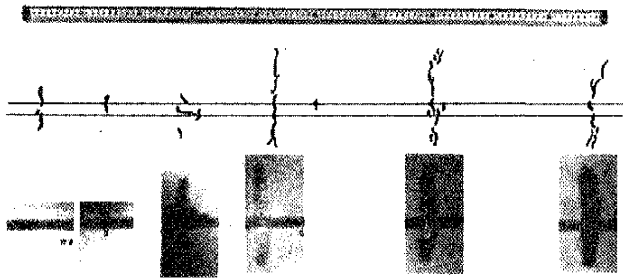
Sketch of seam weld with prints of radiographic film to illustrate cracking and weld repairs in 42-in. dia. ammonia tank.
